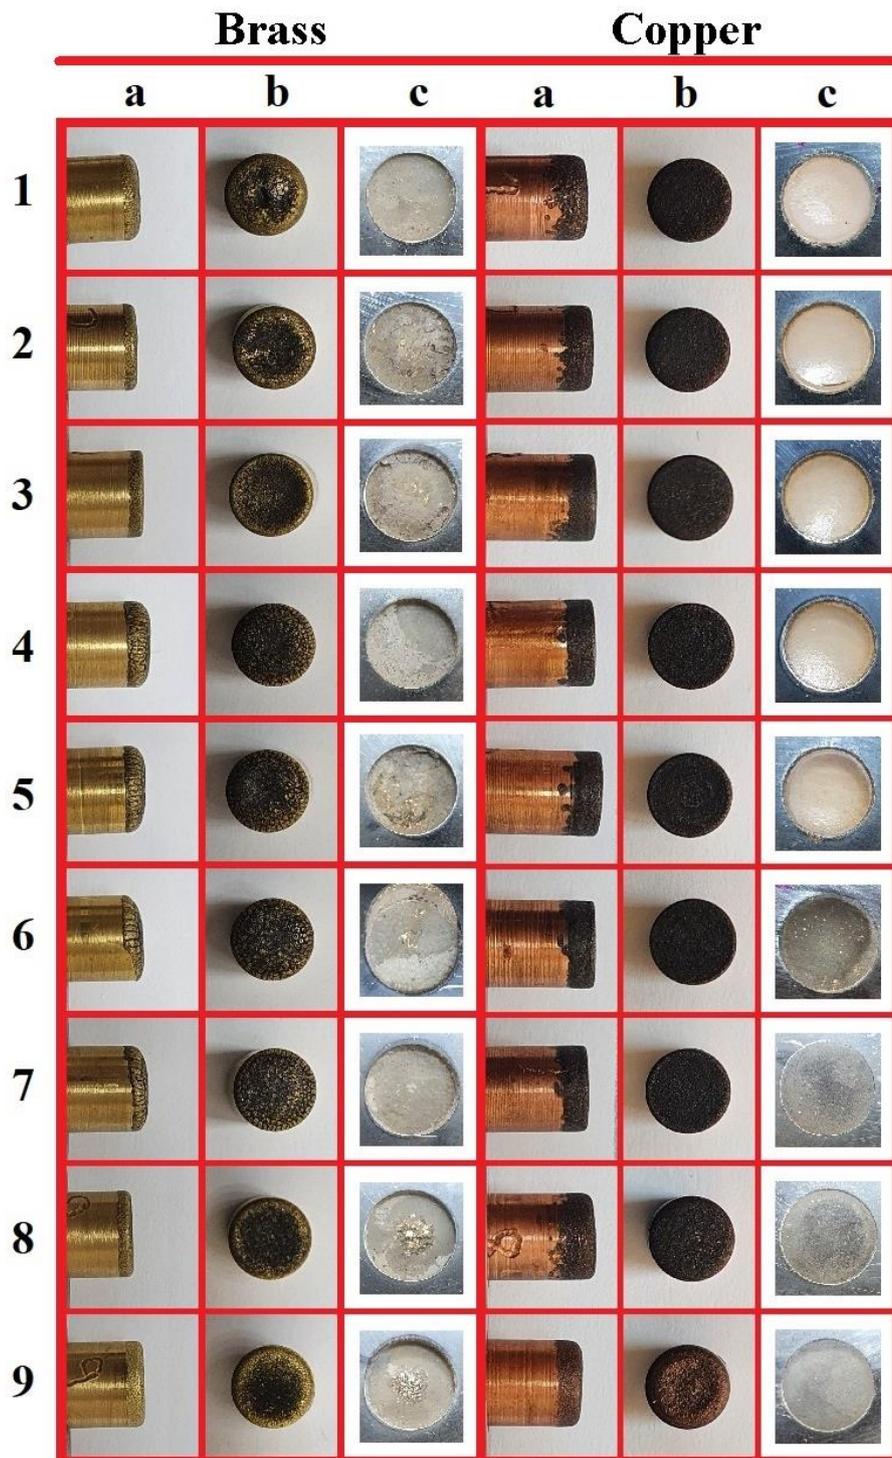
Processed test samples: (a) electrode side (b) electrode top (c) workpiece hole
